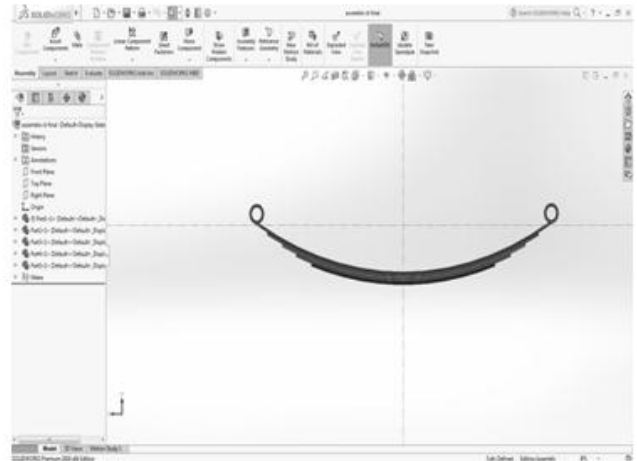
LEAF SPRING MODELLED USING SOLIDWORKS FOR TEST CONDITION 7
